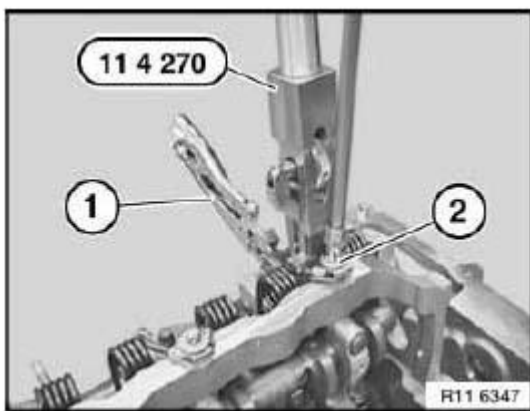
Torsion Spring Screw And Special Tool (11 4 270)
